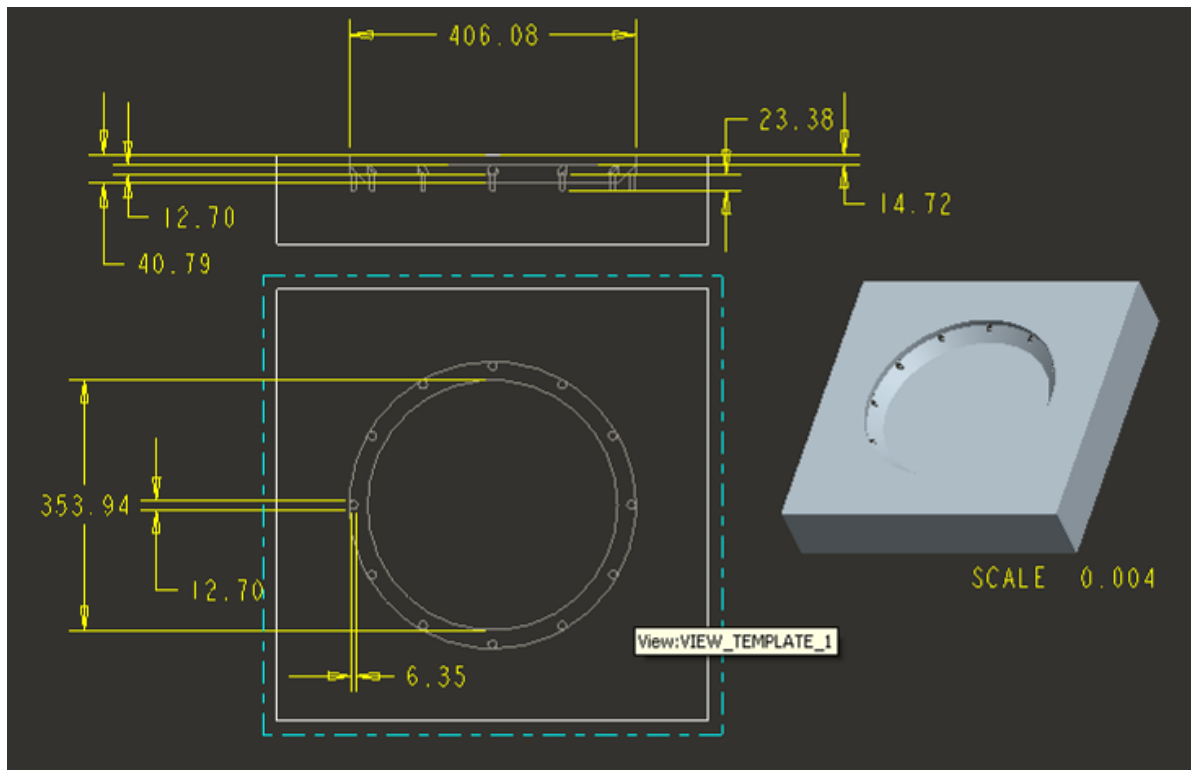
CAD of hub cavity, labeling all dimensions needed to manufacture a replica cavity
